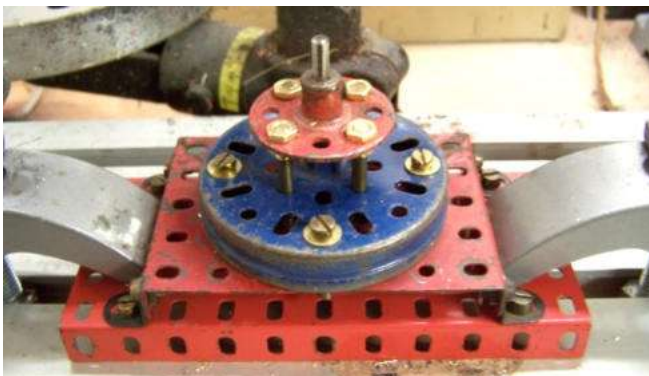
Divider made from Märklin parts for attaching the 8 required holes
